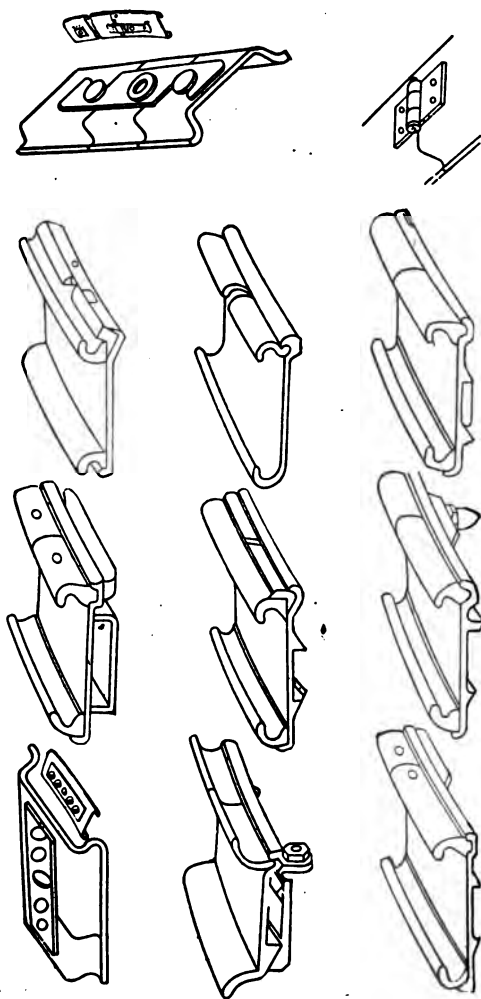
Kinds of rims. Upper row, left to right—Baker split straight side; Booth removable side flange; Firestone removable side flange with lock ring; Detroit connection for split rim; Perlman. Second row, left to right—Goodyear spring side flange; Goodyear removable side flange with lock ring; Houk spring side flange. Third row, left to right—Kelsey spring removable side flange; Standard spring, removable side flange.
